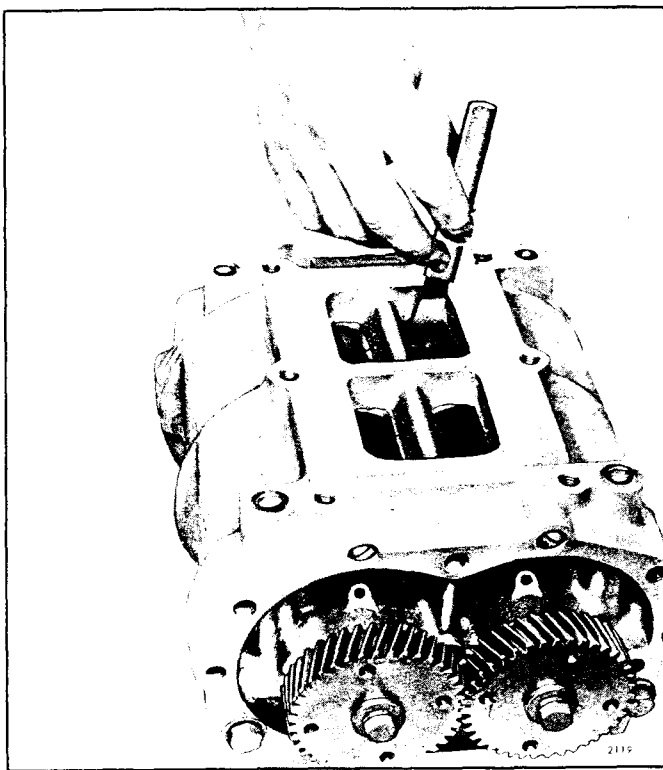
Measuring Rotor Lobe to End Plate Clearance
